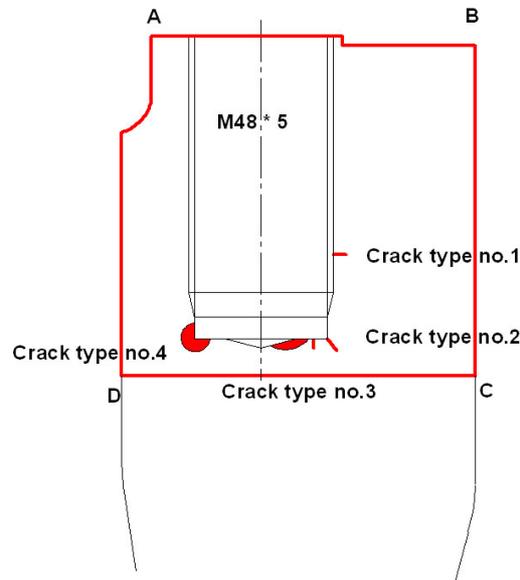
Inspection volume of threaded holes of steam collector flange area (marked A-B-C-D)
